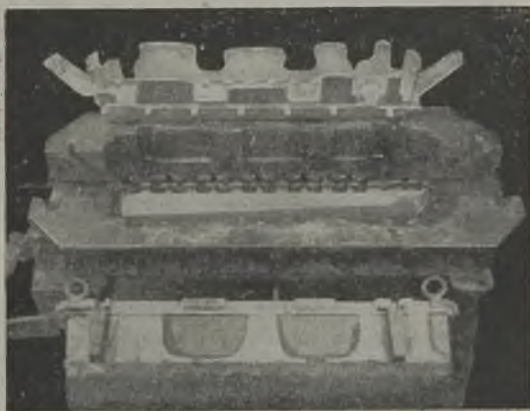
CONSTRUCTION OF "ROCKER COVER" DIE.
